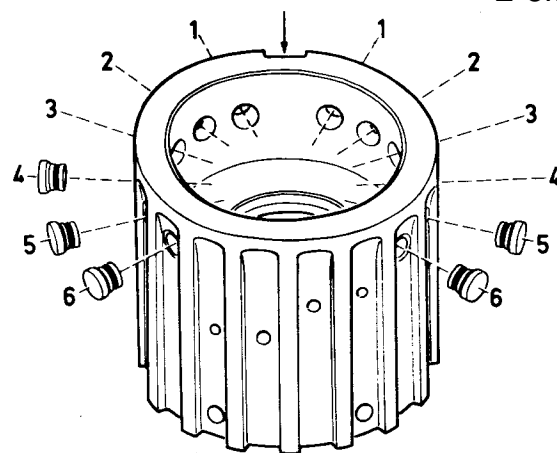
The valve casing in COP 6 is, as standard, equipped with five plugs which can be removed if extra flushing through the drill and bit is required
